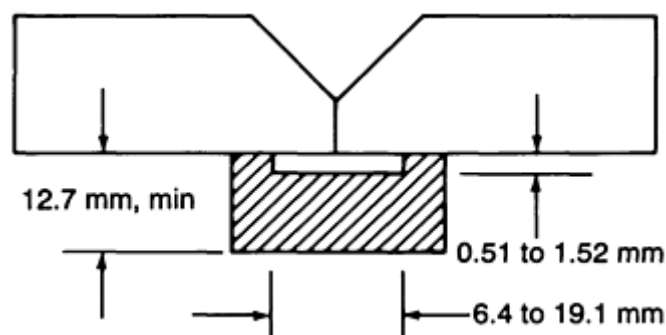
RECOMMENDED GROOVE DIMENSIONS FOR COPPER BACKING BARS IN THE SUBMERGED ARC WELDING OF STAINLESS STEELS. SOURCE: REF 26
